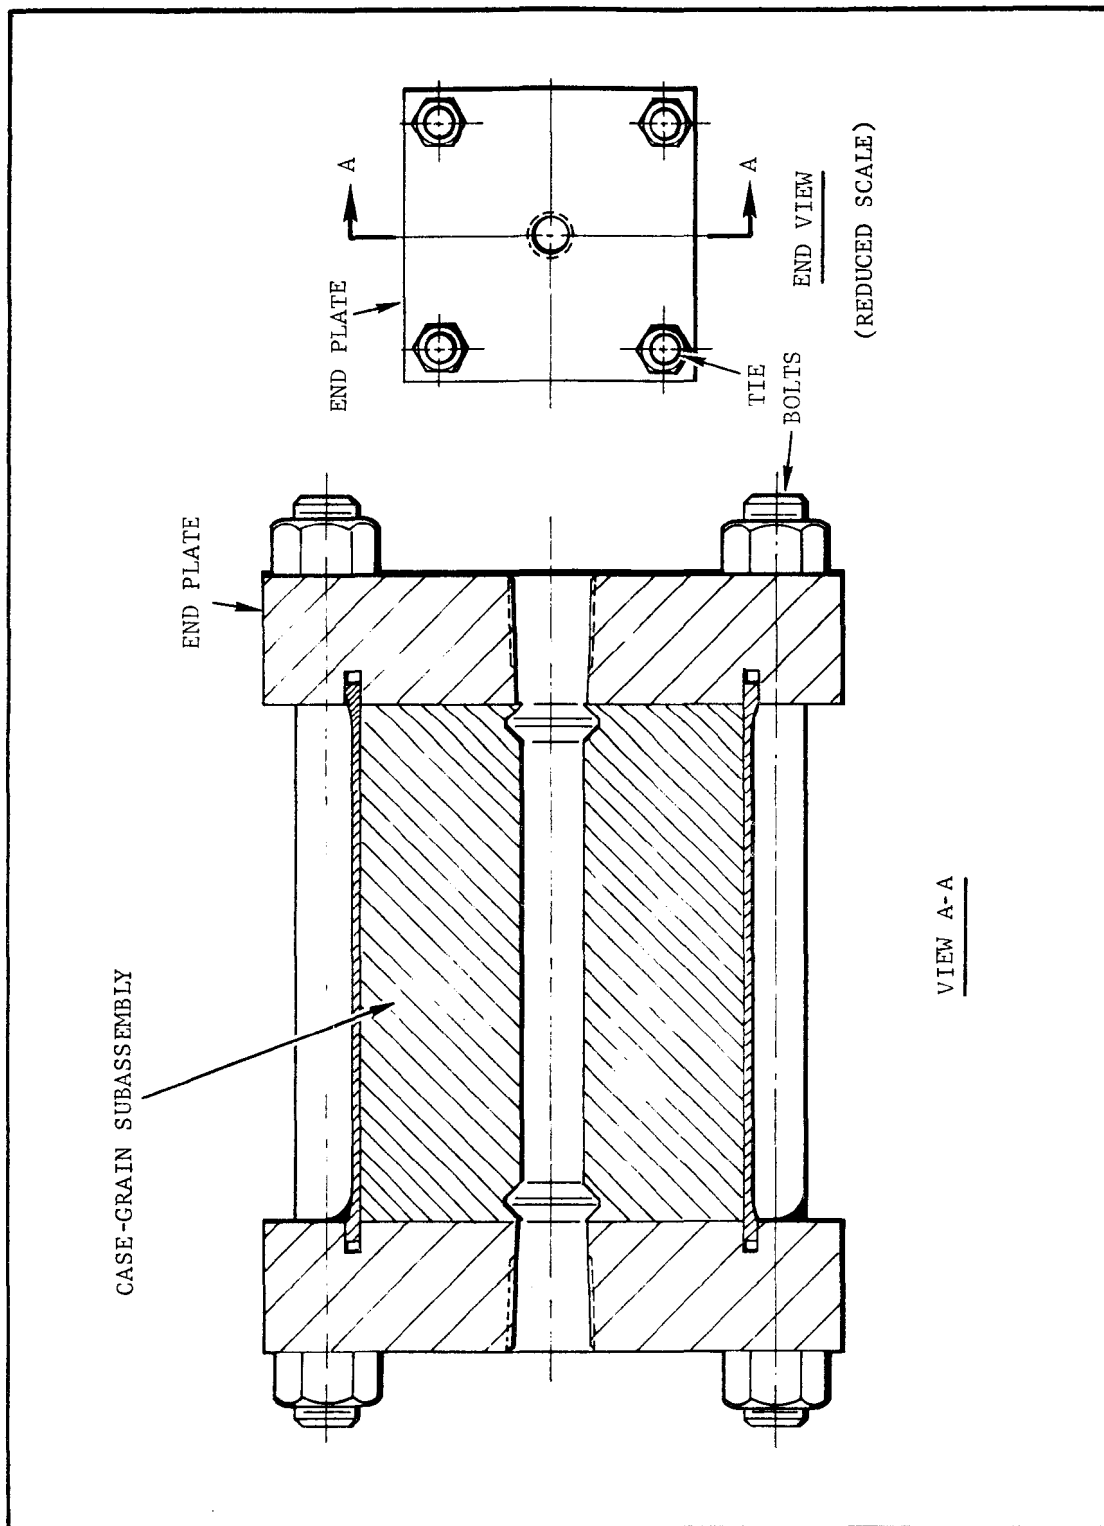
Wing Slot Cracking Failure Mode Model (Circular Center Bore), Complete Assembly
